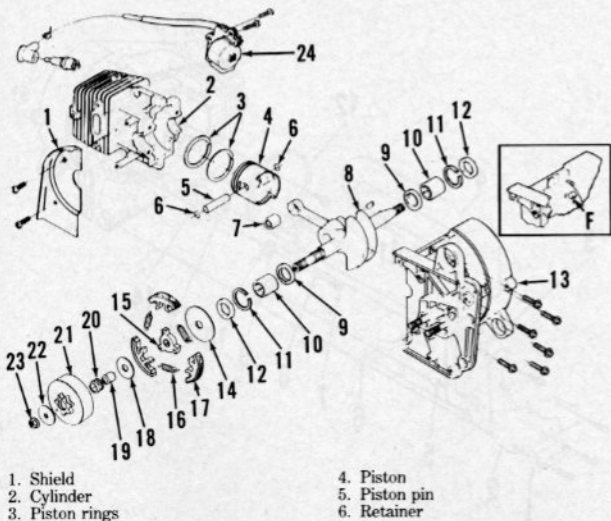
Exploded view of engine and clutch assemblies. Pulse fitting (F) is connected to oil pump pulse hose.
